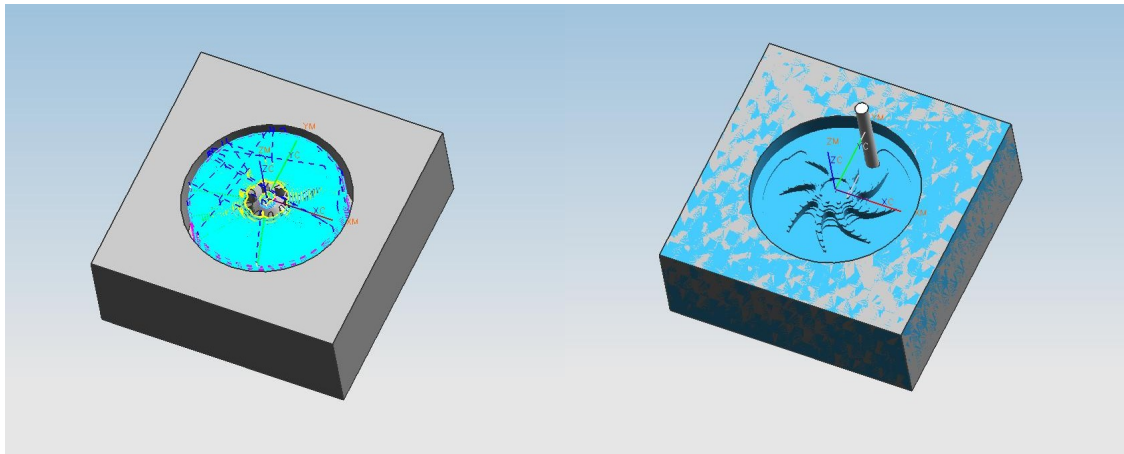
Tool path and 3D simulation of the machining process for the impeller Model 2 in the rough milling process with a 5mm end mill
